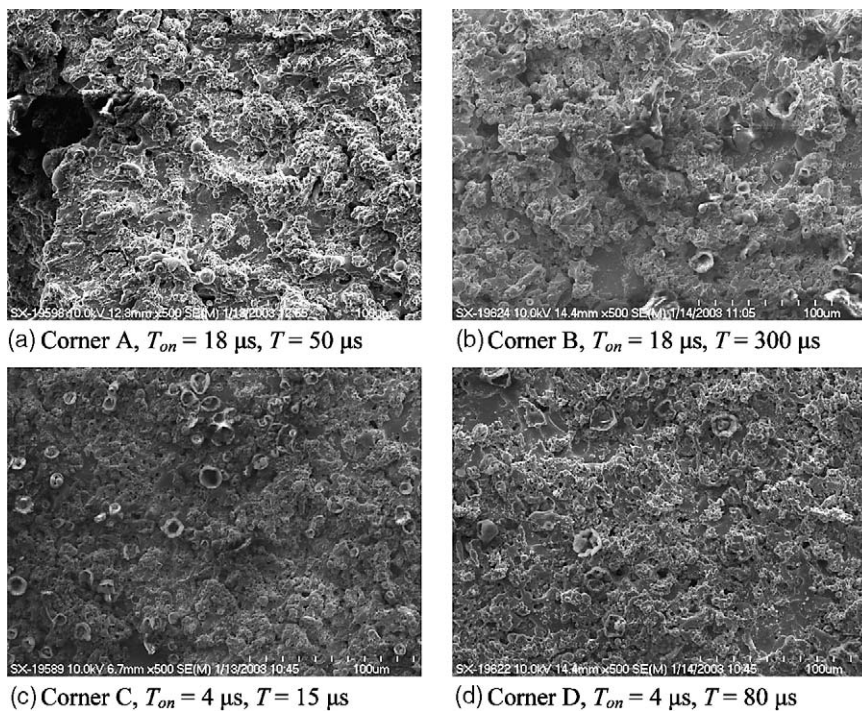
SEM micrographs of 316 stainless steel foam surface machined by EDM.
